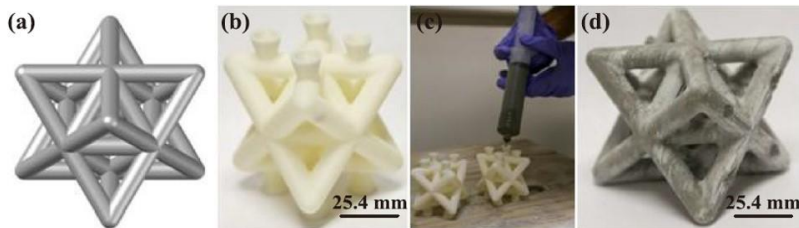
Schematics of typical procedures for indirect printing, a) designed structure, b) 3D printed polymer mold, c) casting cementitious mixture into the 3D printed molds, d) specimen after dissolving the mold [24]
